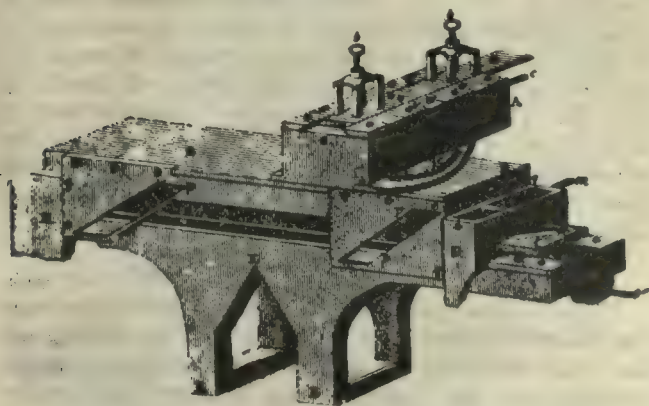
SLIDE REST ON MAUDSLAY'S LATHE
